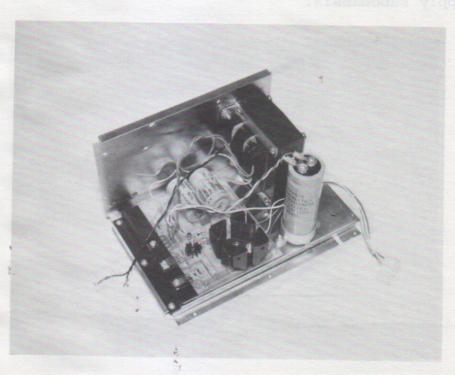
Sol-10 power supply subchassis assembly. (Rear of subchassis at left.)
